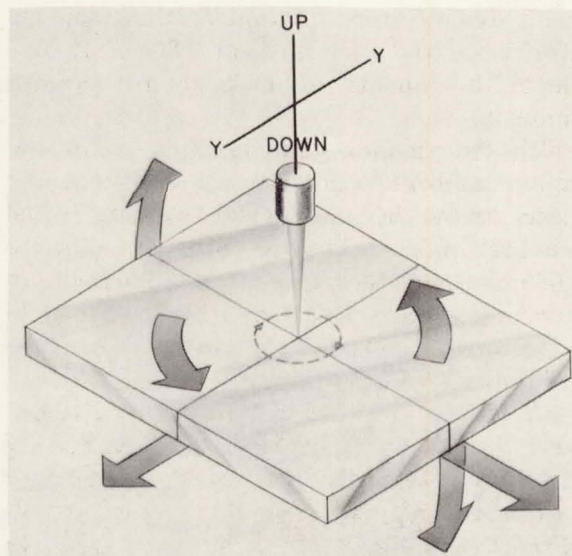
Degrees of freedom in electron-beam welding.
